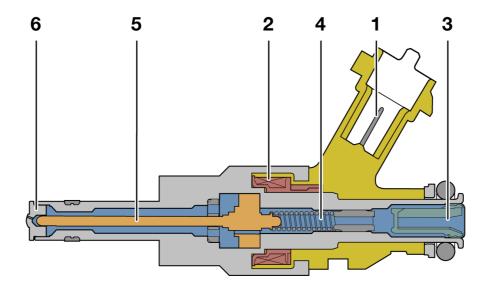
Cutaway drawing, high-pressure fuel injector HDEV
